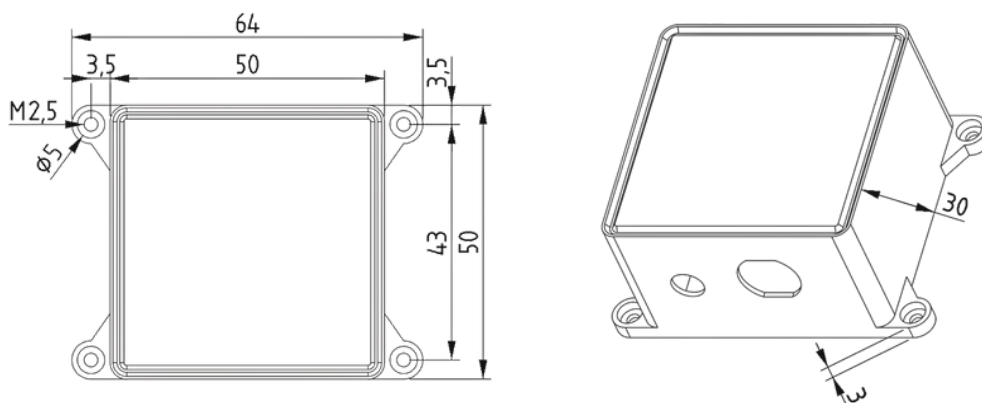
AGM-810 External Dimensions (Unit: mm)
